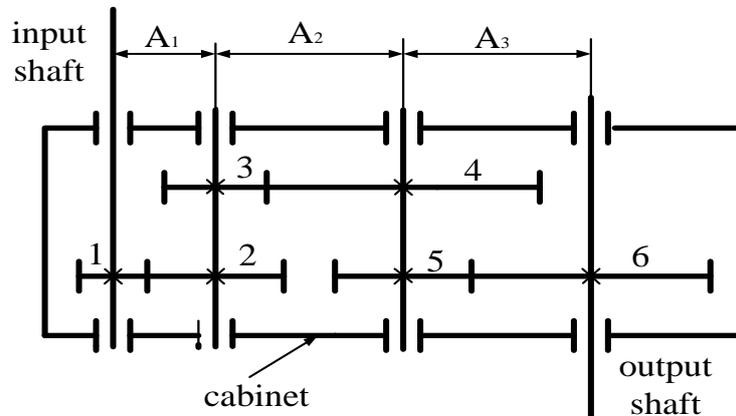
Three-grade helical cylindrical gear reducer for a port crane
